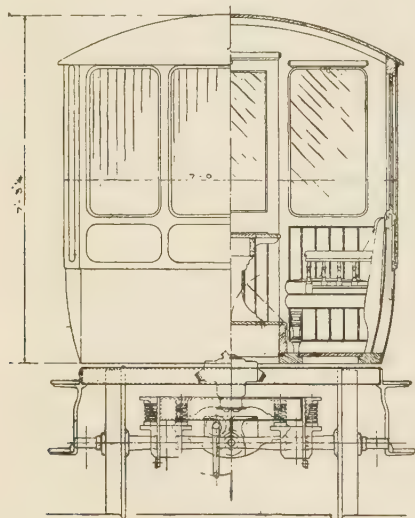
END VIEW N.E.R. RAIL MOTOR CAR.
